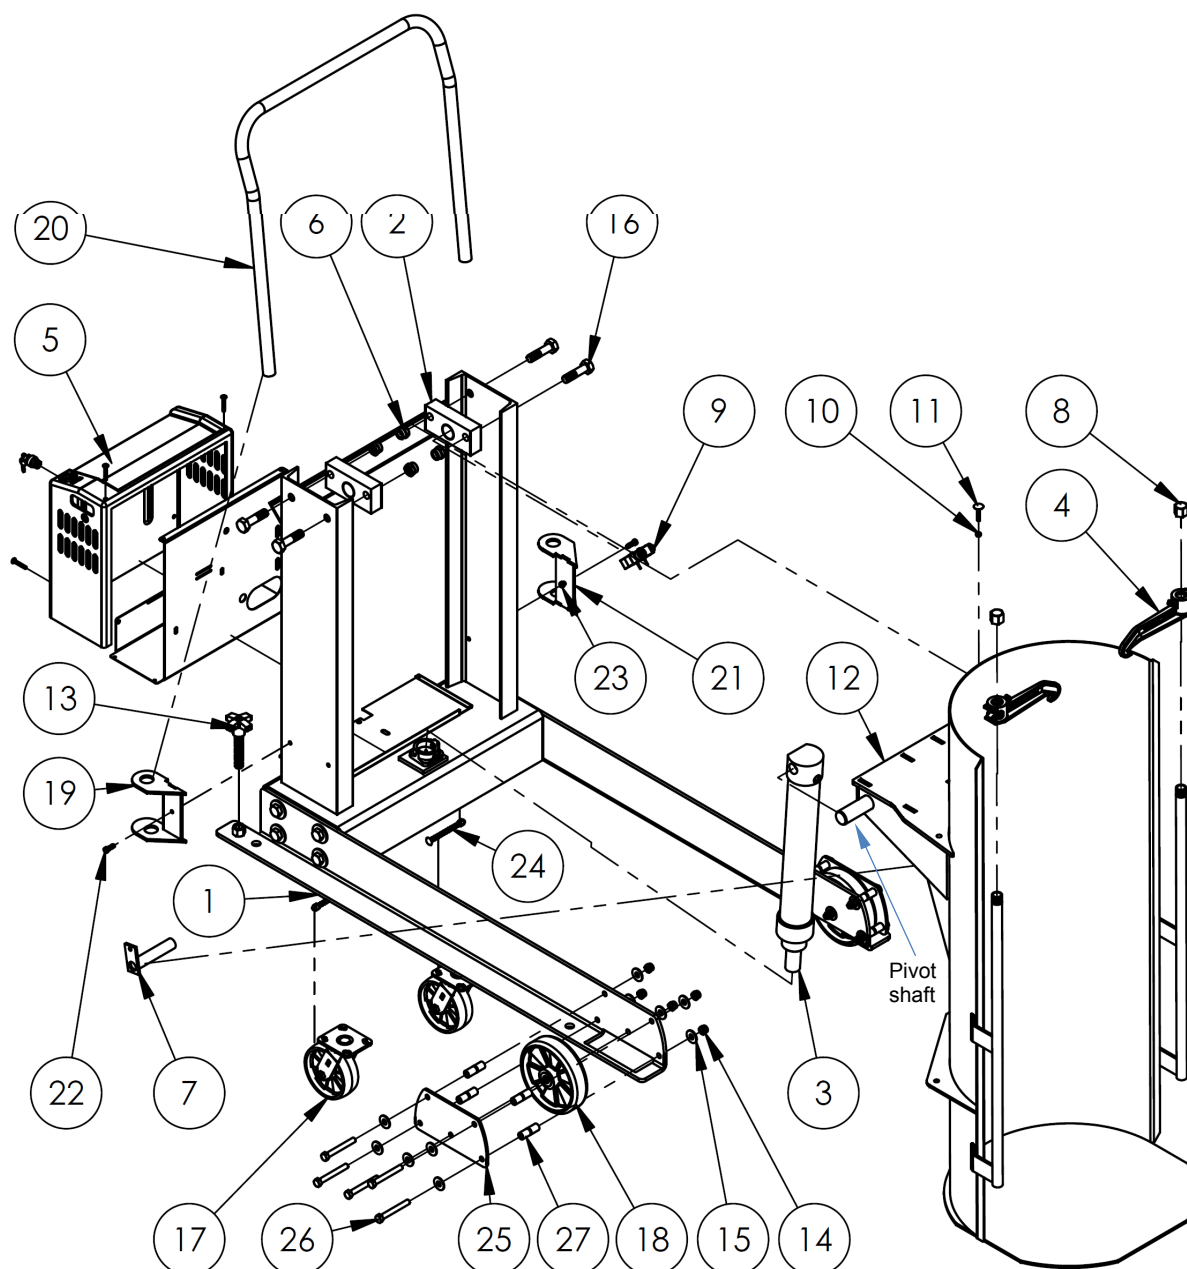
HDD-60-S series stationary dumpers exploded parts diagram and bill of materials
